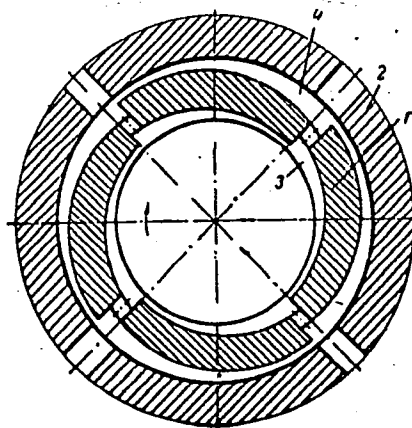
1 - floating bushing; 2 - bed of the bearing; 3 - internal wedge-shaped oil recesses; 4 - external wedge-shaped oil recesses
